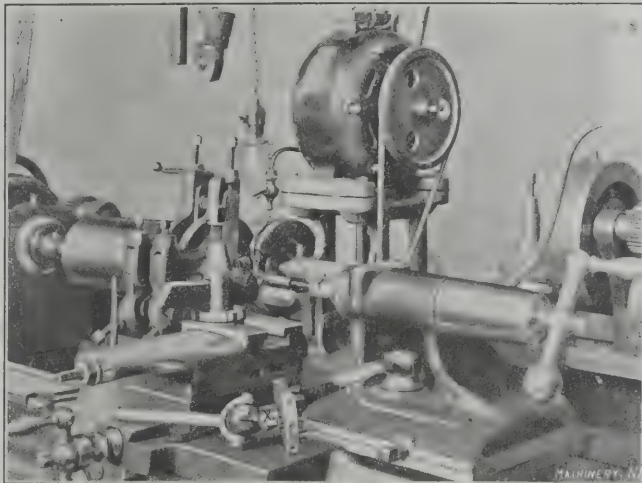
Finish Turning and Grinding the Bowl Spindles
